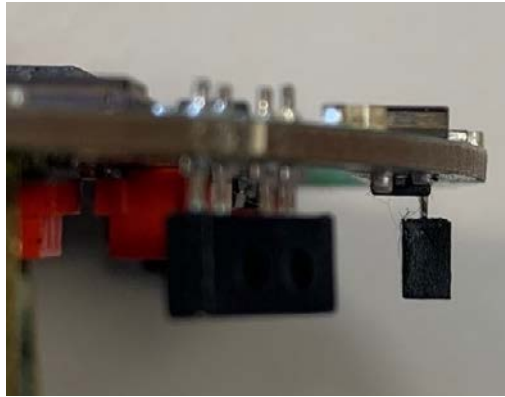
The proximity sensors should be perpendicular to the e-puck board and soldered properly.
